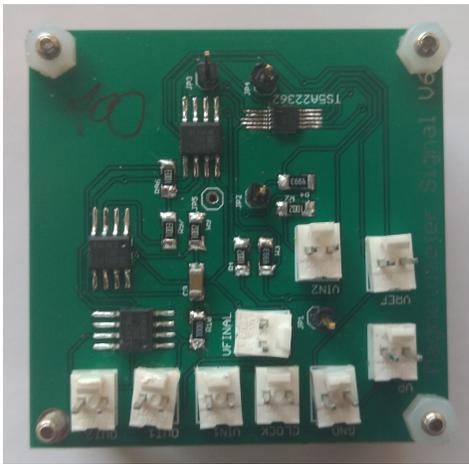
Constructed PCB for the signal processing of MAG-SPEL
